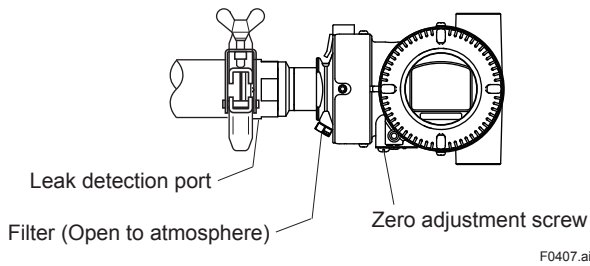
Transmitter Mounting (Horizontal Direction)
